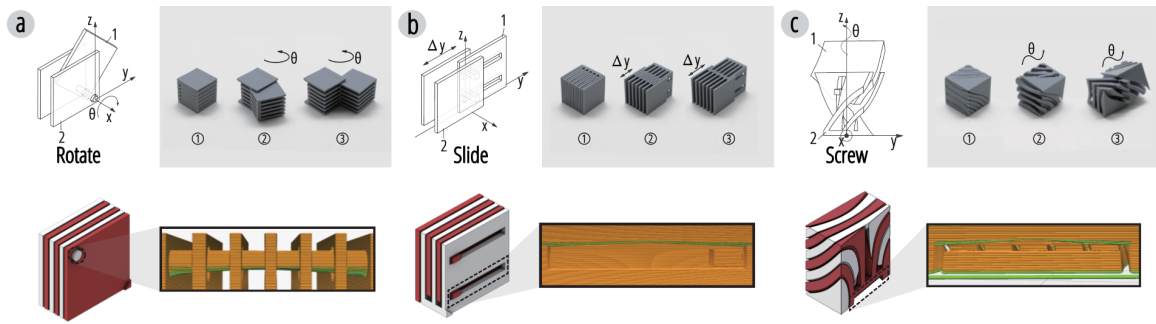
All-in-One Print primitives with (a) arch printed shaft through the whole cube; (b) arch printed slider for well-reserved gap; (c) arch printed bar connecting four parts.
